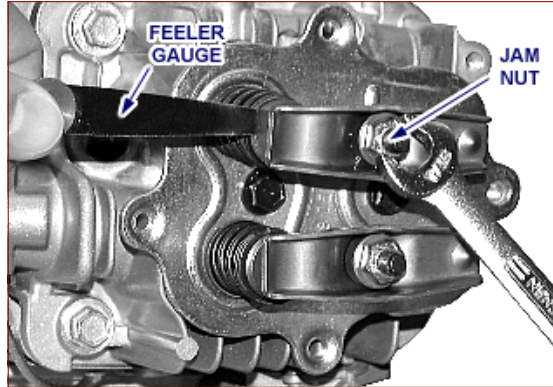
Adjust Rocker Arm Clearance, Current Style
